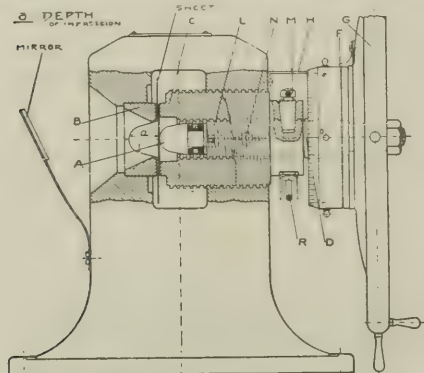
CONSTRUCTION OF TESTING MACHINE
